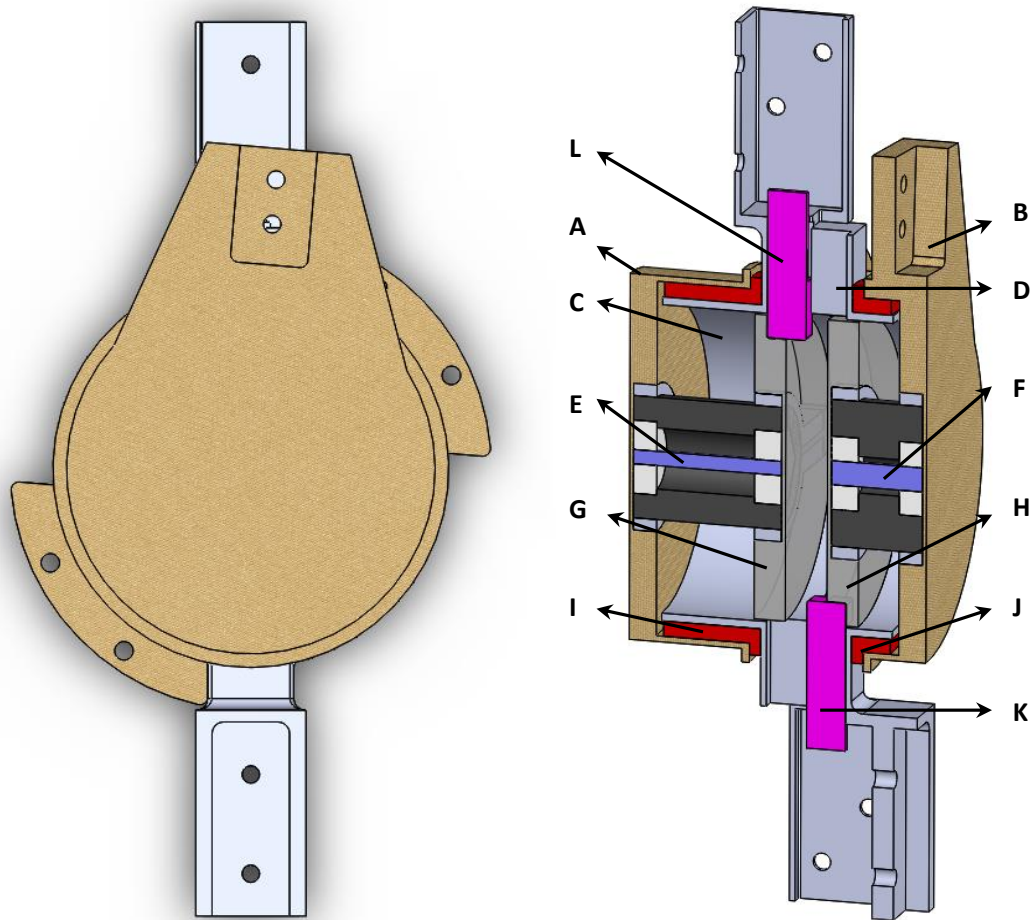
The Dynamic Knee Module Assembly. (A) Swing Side of the External Frame of the Knee Module; (B) Stance Side of the External Frame of the Knee Module; (C) Swing Side of the Internal Frame of the Knee Module; (D) Stance Side of the Internal Frame of the Knee Module; (E) Swing Actuating Part; (F) Stance Actuating Part; (G) Swing Support Disk; (H) Stance Support Disk; (I) Swing Sleeve Bearing; (J) Stance Sleeve Bearing; (K) Stance Engagement Mechanism; (L) Swing Engagement Mechanism.
